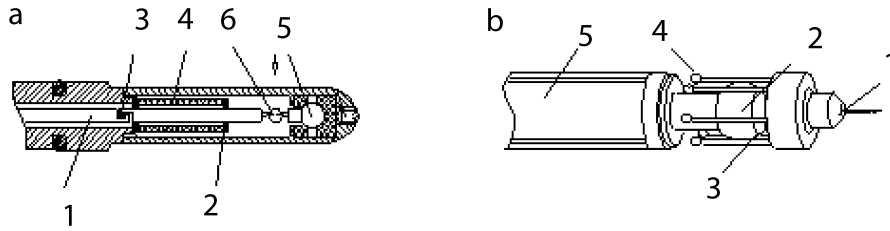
TEM-SPM designs a Stepper motor based TEM-holder (not to scale): 1 – shifting rod by stepper motor, 2 – graphite rings, 3 – clutch, 4 – piezo tube, 5 – preadjustment ball, 6 – electron beam. b Ball-type of the inertial slider: 1 – tip holder, 2 – sapphire ball, 3 – sliding rods, 4 – counter weight, 5 – piezo tube
